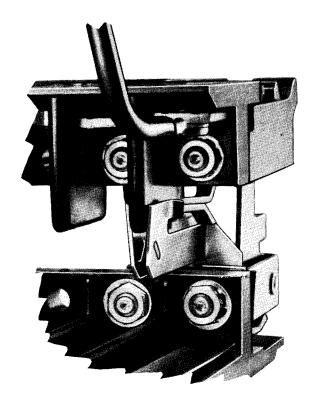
Auxiliary Short Circuiting Switch (Enlarged View)
